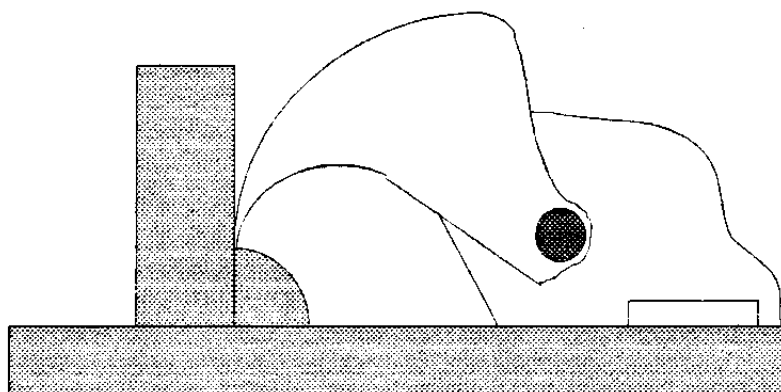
Measurement of leg length of a fillet weld
